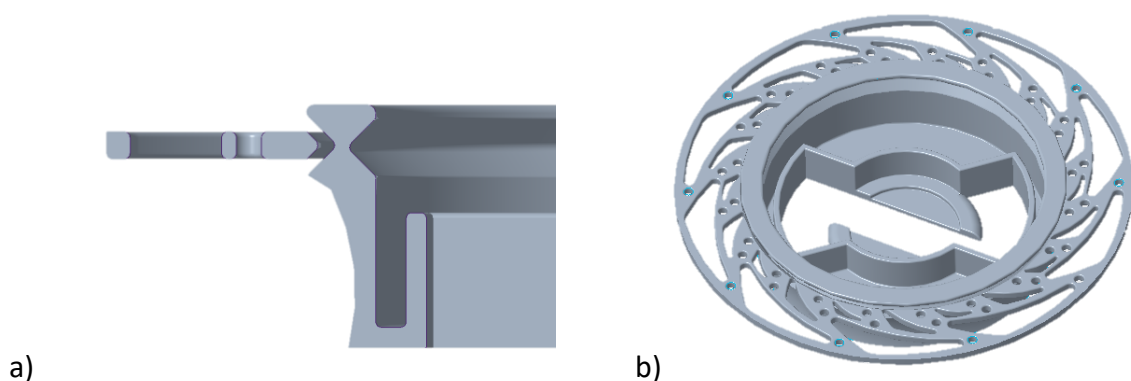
Bottom support joint a) Section View. b) General view (Source: Author's own).
